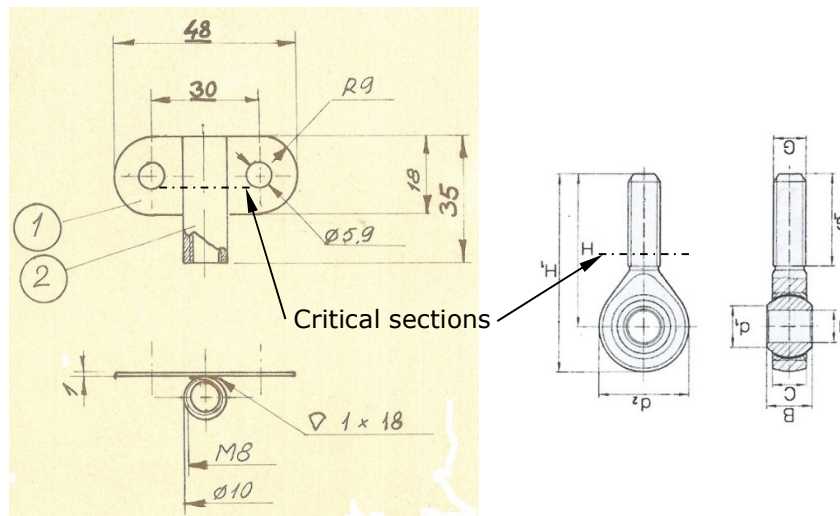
Tailplane forward fitting bracket and rod end, ref. drawing 4-20D-58-100-1(a).
